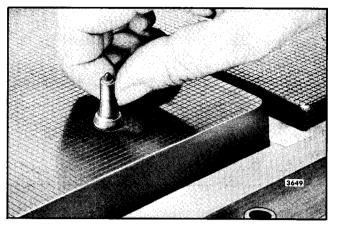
Lapping Spray Tip on Lapping Blocks J 22090
